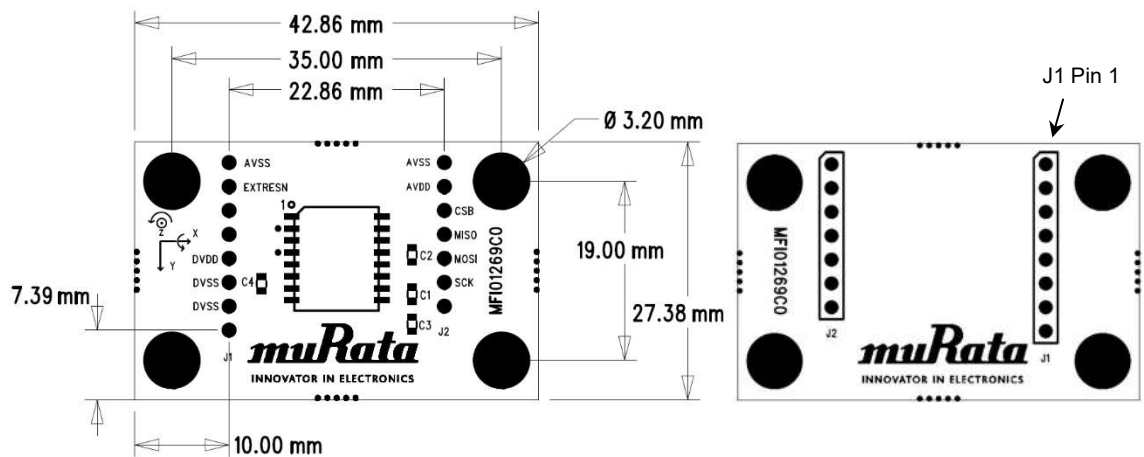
TOP (left) and BOTTOM (right) view assembly drawings for SCC400T PCB (aspect ratio not 1:1).
